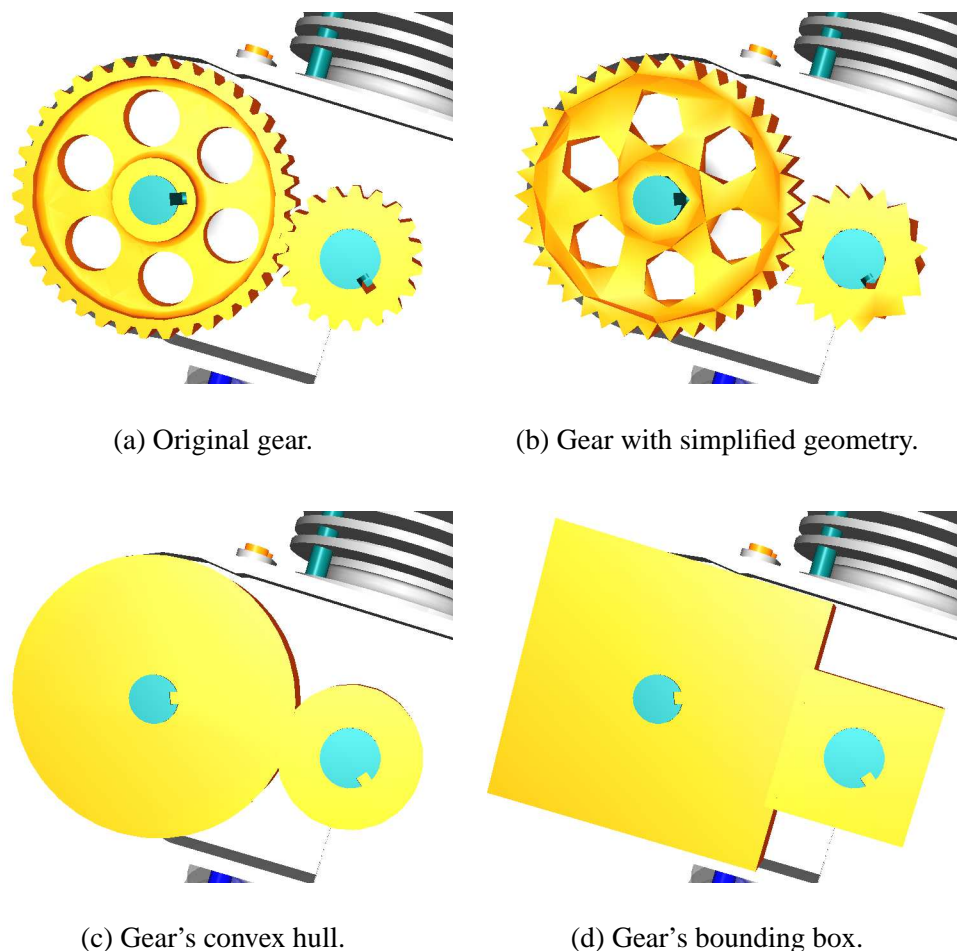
Role-based Viewing Examples of Exterior Gears of Engine Assembly
